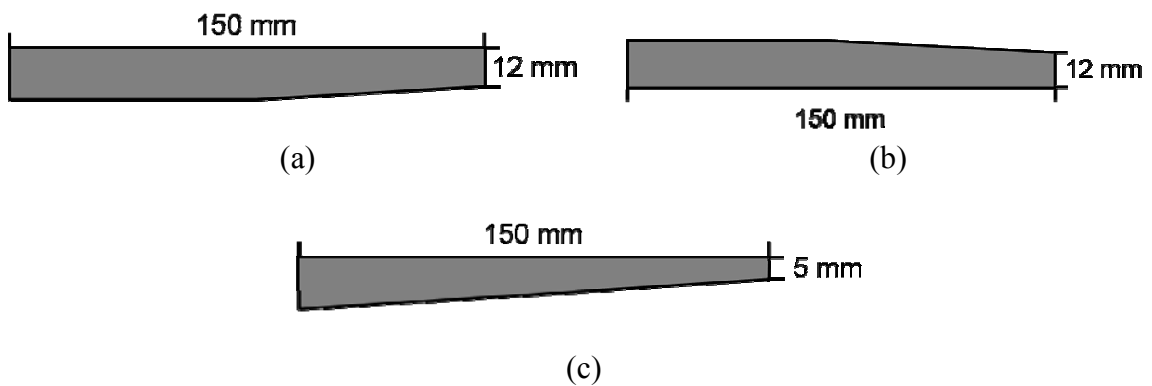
Cross-section schematic drawing of the 200 mm reactor susceptor bottom with a portion of the (a) bottom removed and (b) top removed to produce a backend thickness of 12 mm, (c) bottom removed additionally from (a) to produce a backend thickness of 5 mm.
